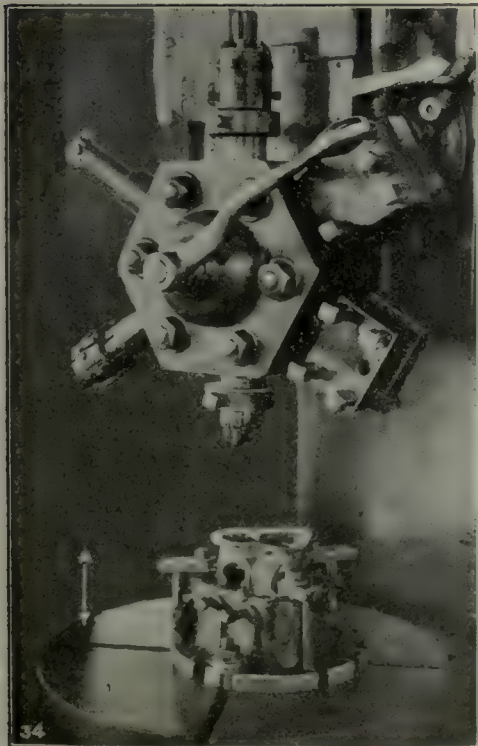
BORING AIR MOTOR CYLINDERS. FIG. 35—METHOD OF LOCATING THE FIXTURE
